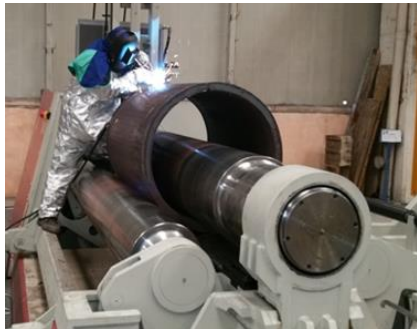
Final closing operation of the shell at a radius of R370 and spot welding on rolling machine
